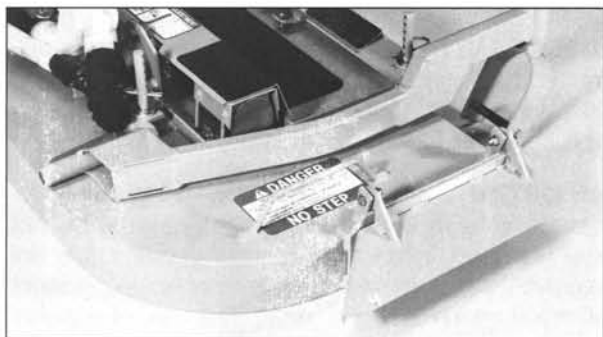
Assembly of Discharge Shield on Side Discharge Deck
